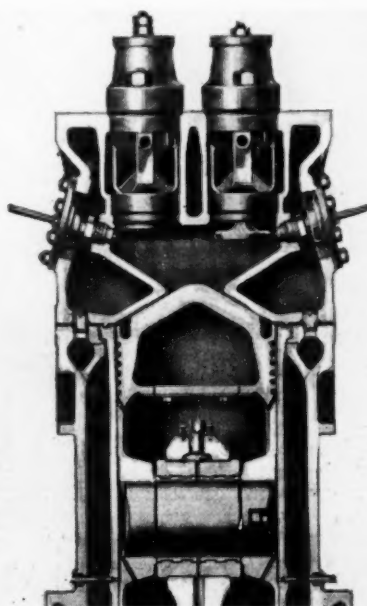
PRICE ENGINE WITH SEPARATE COMBUSTION CHAMBER
